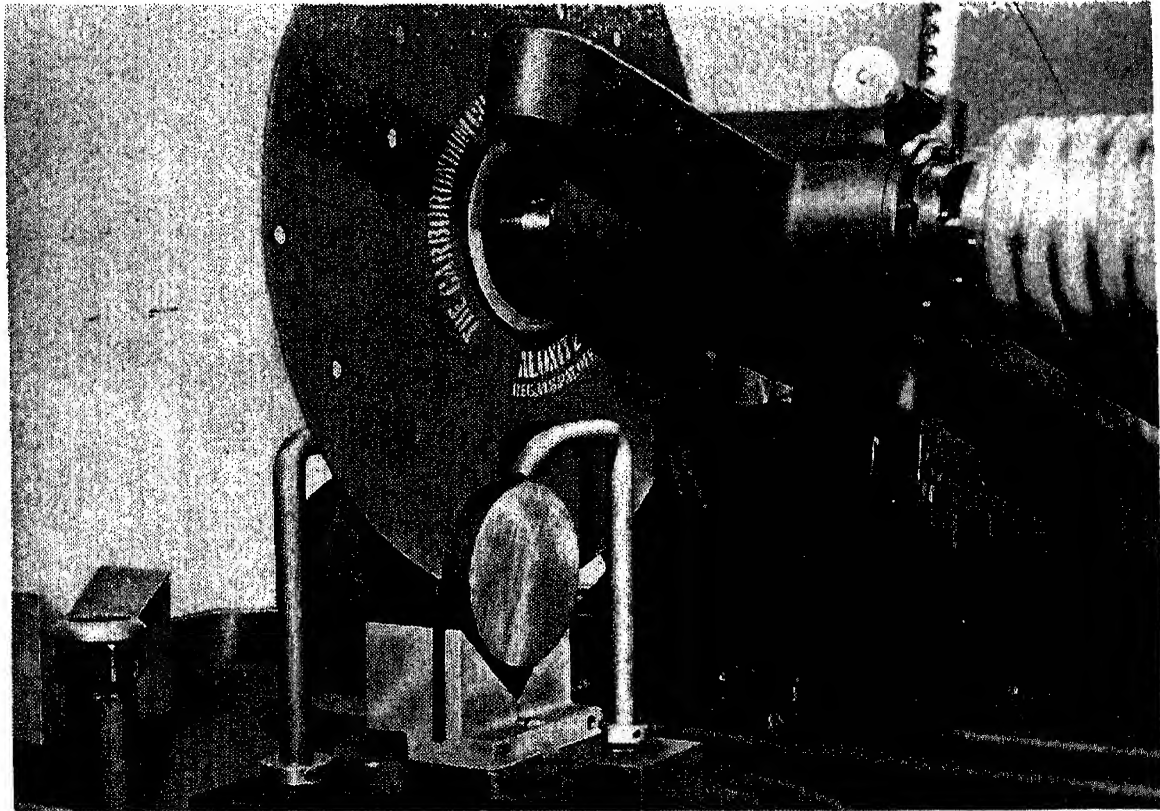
An abrasive cut off wheel mounted on a high speed swing frame machine. The holes in the wheel help carry coolant into the cut. (Courtesy The Carborundum Co.)
